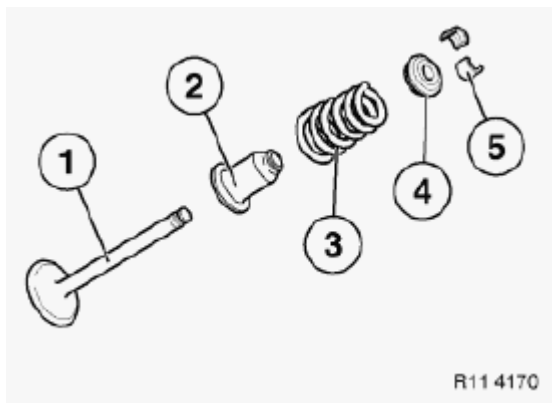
Upper Spring Plate, Valve Tapers And Spring
